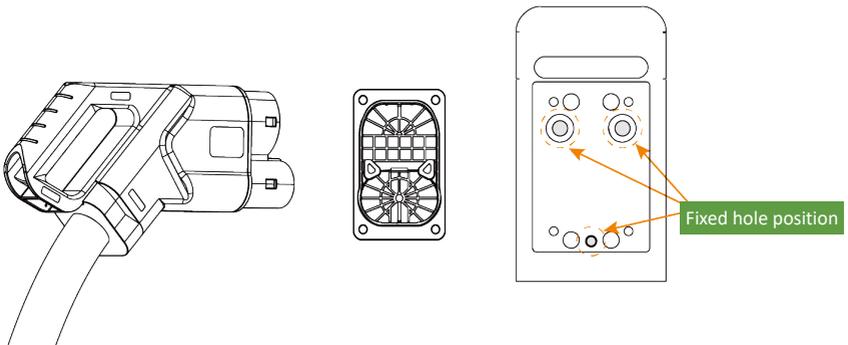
schematic diagram of hole location of charging connector placement assembly1
